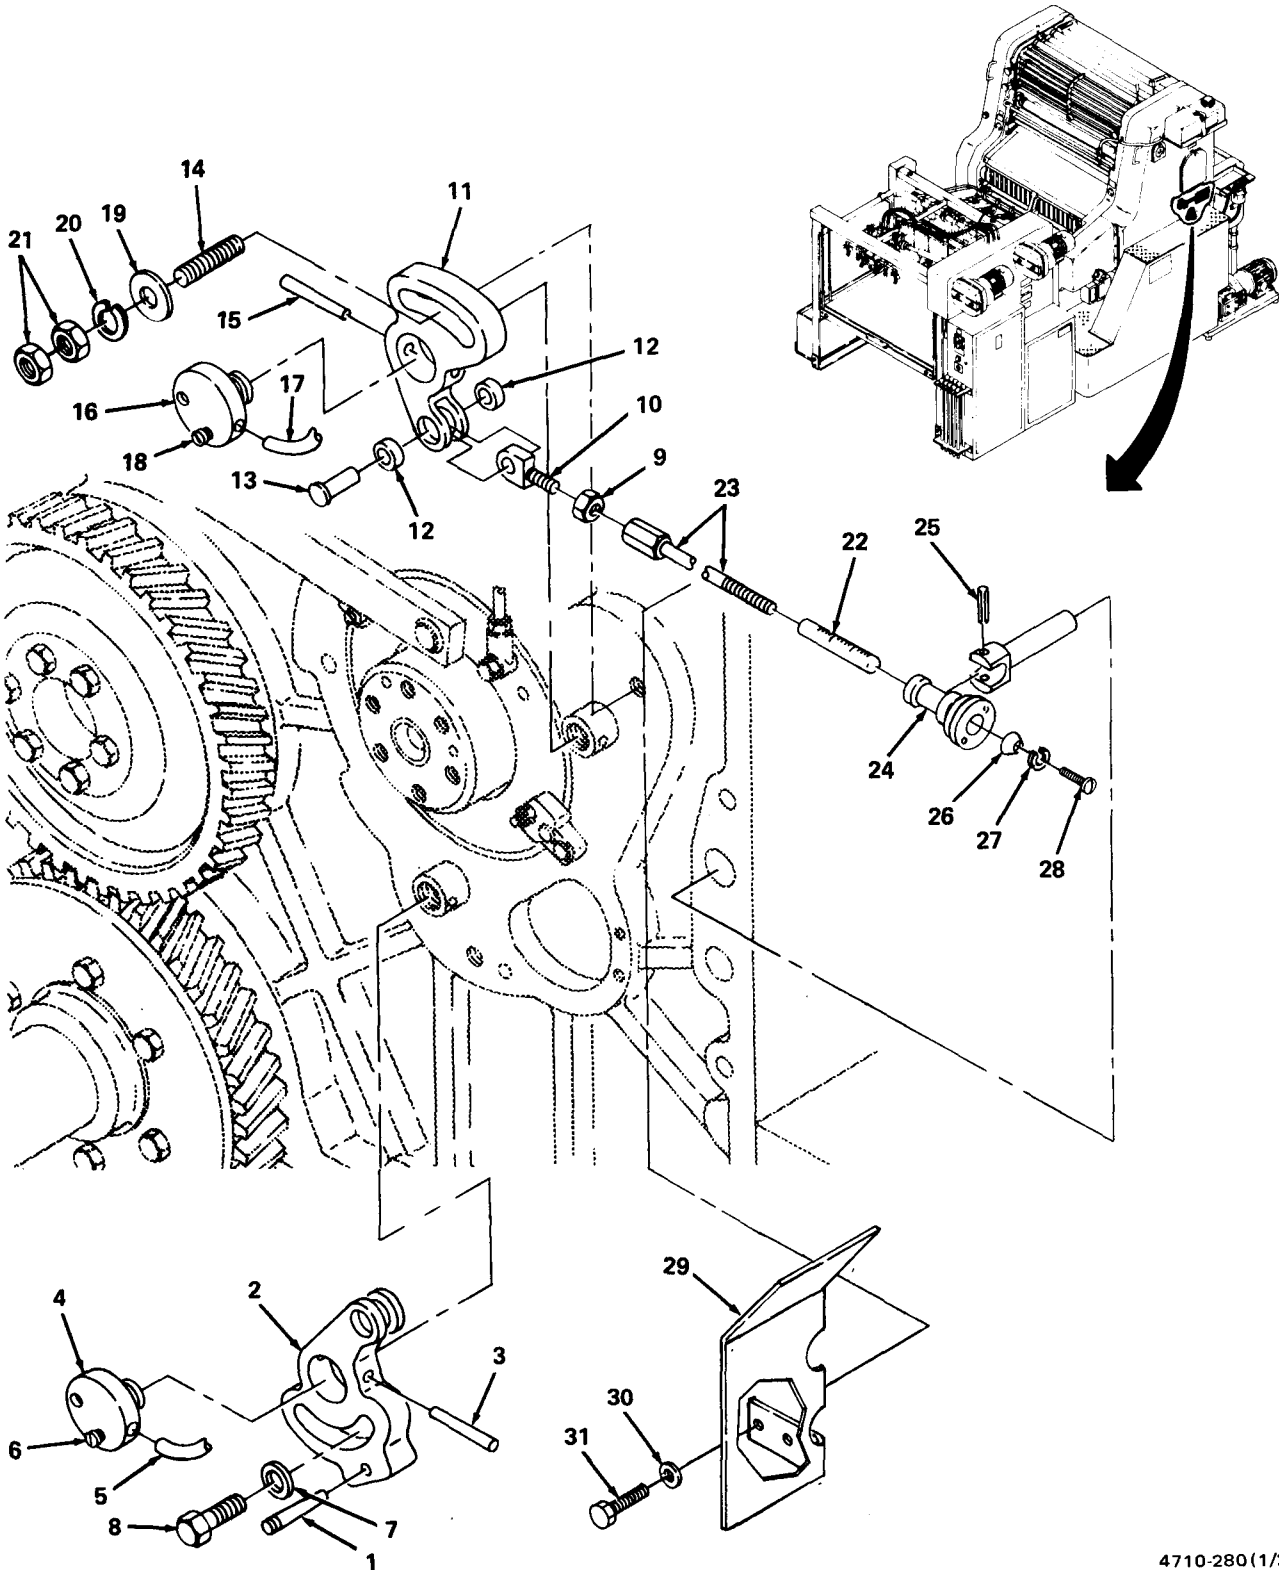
Spindle and Bearing Bolt Assembly (D/S) Installation.
